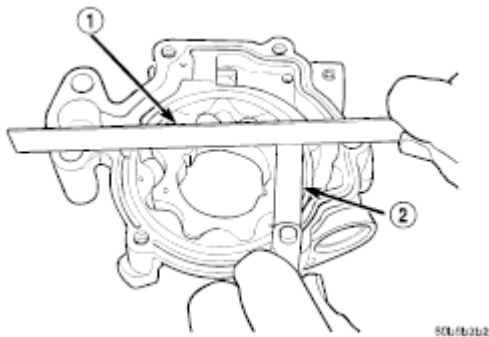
Measuring Clearance Between Rotor And Oil Pump Body
